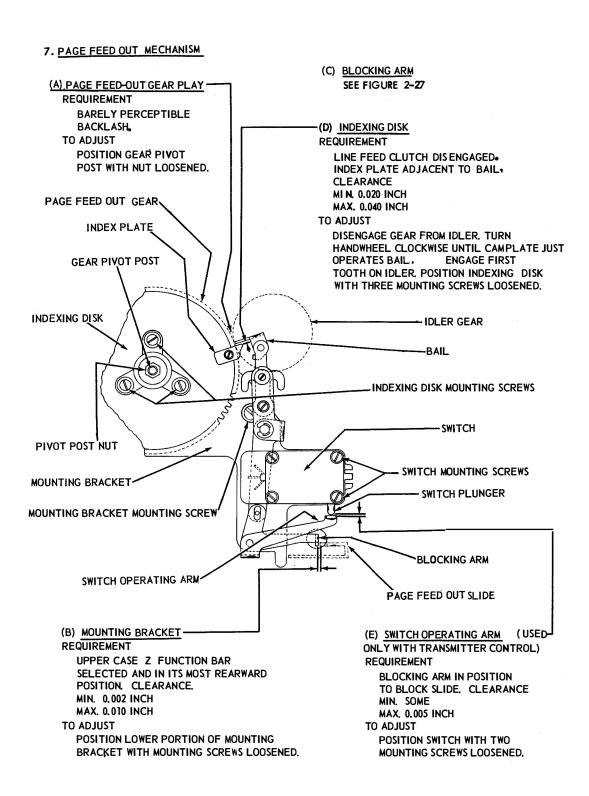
TYPING UNIT, PAGE FEED-OUT MECHANISM
